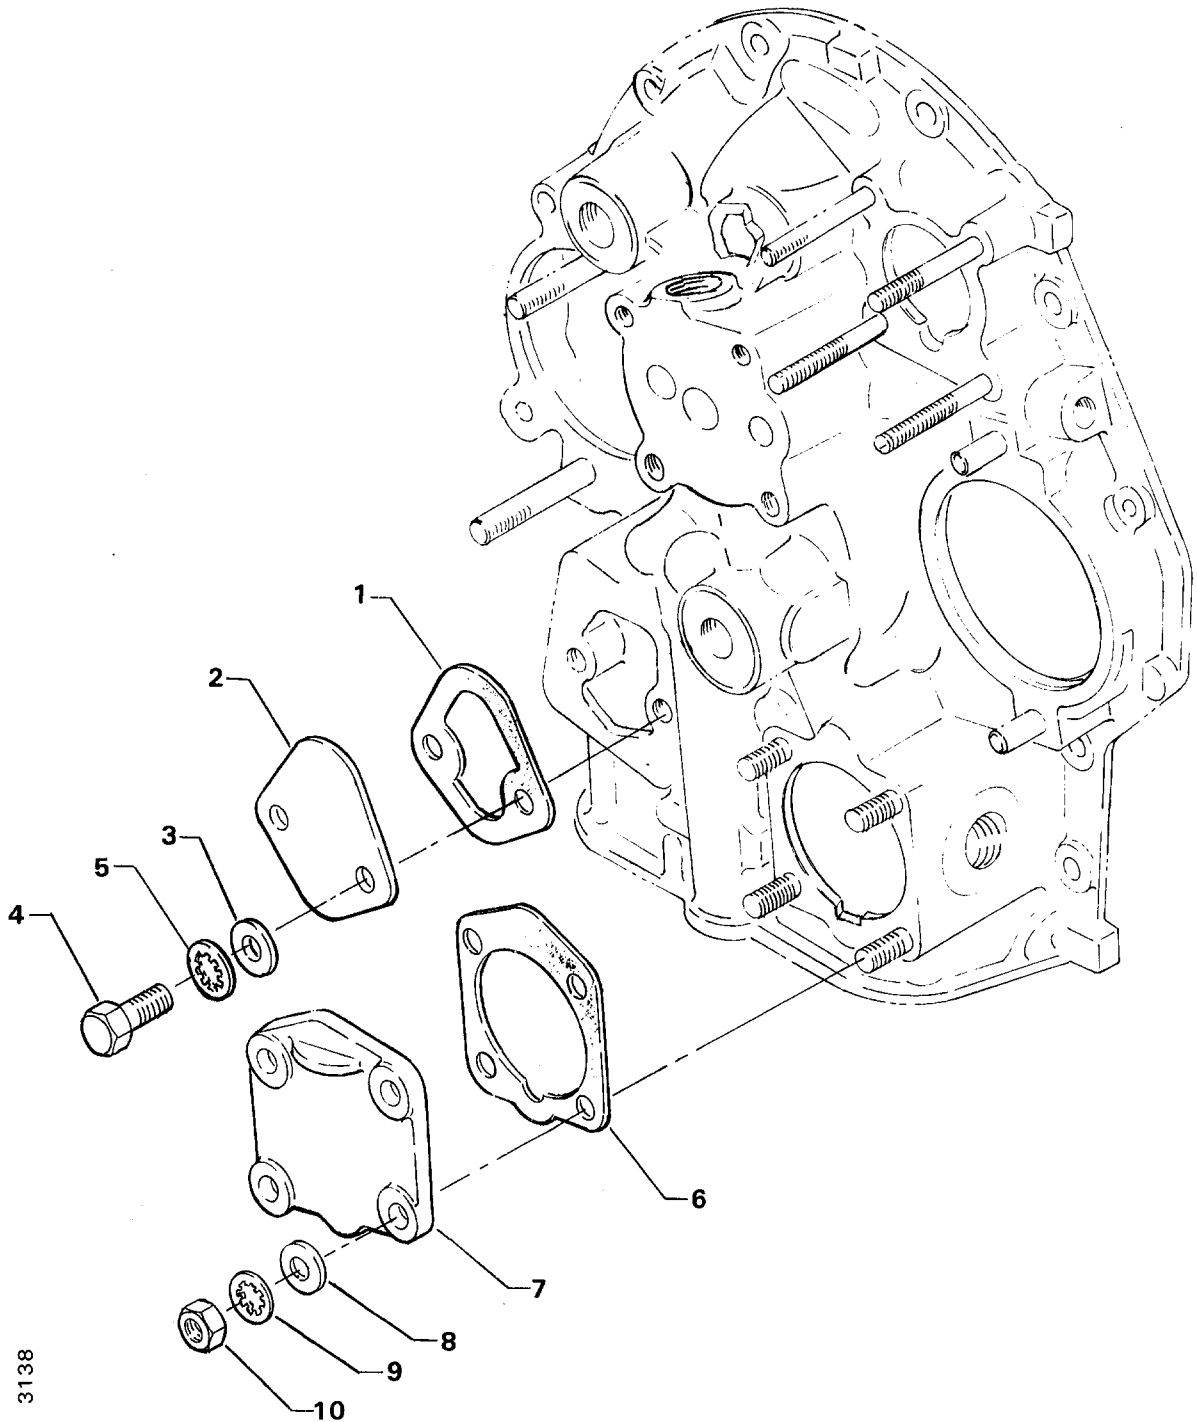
OIL PUMP AND ACCESSORY HOUSING ATTACHING PARTS
